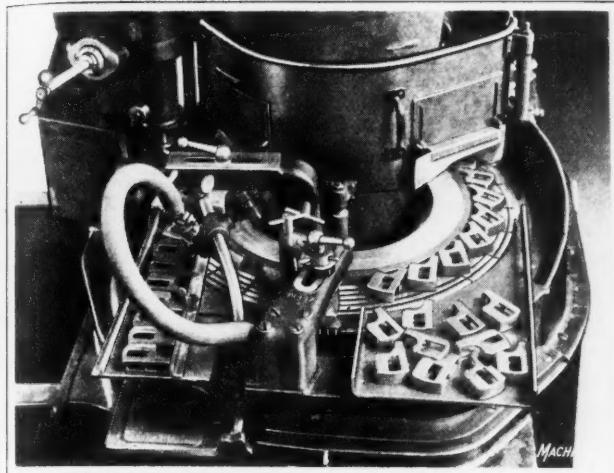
Close-up View of the Position where Work is placed on the Magnetic Chuck
